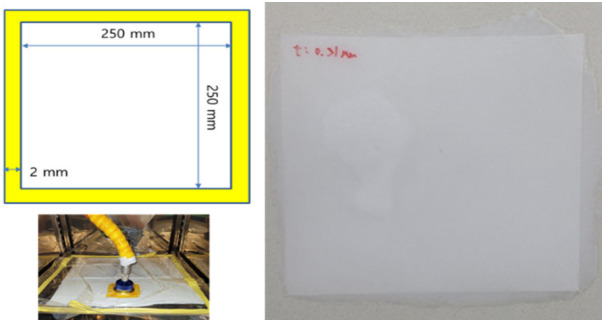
PE adhesive sheet manufactured by vacuum forming
